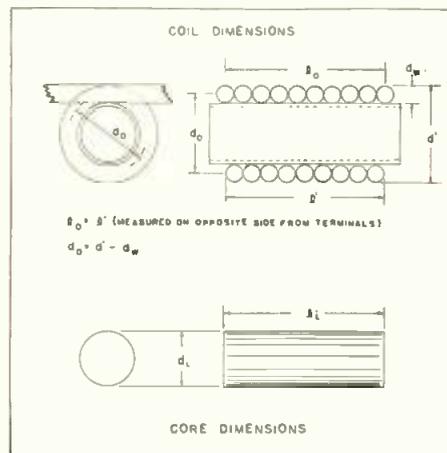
Drawings show how dimensions of solenoid coils and cylindrical cores are made
